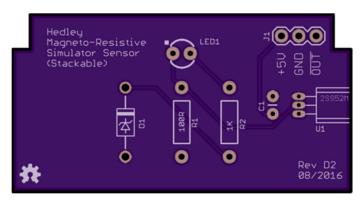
Magneto-Resistive Sensor Board Layout (Type 2)
